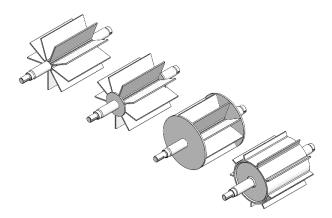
Different End Designs (left to right): open ended, semi end disc, end disc and closed end disc
